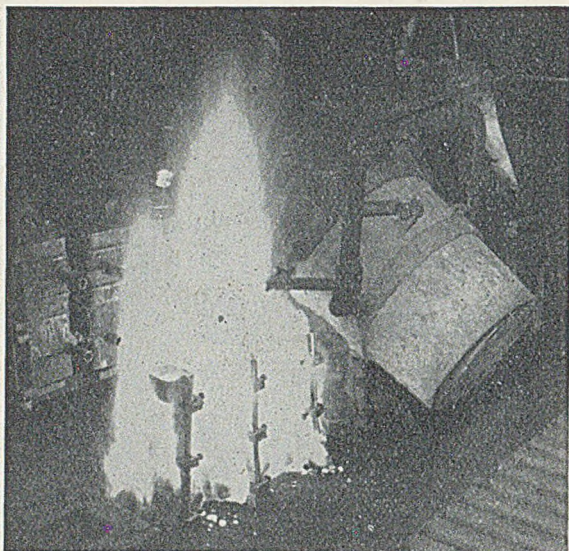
Method of Pouring Shell Moulds, note the Flames from the Initial Combustion of the Resin Bond.
